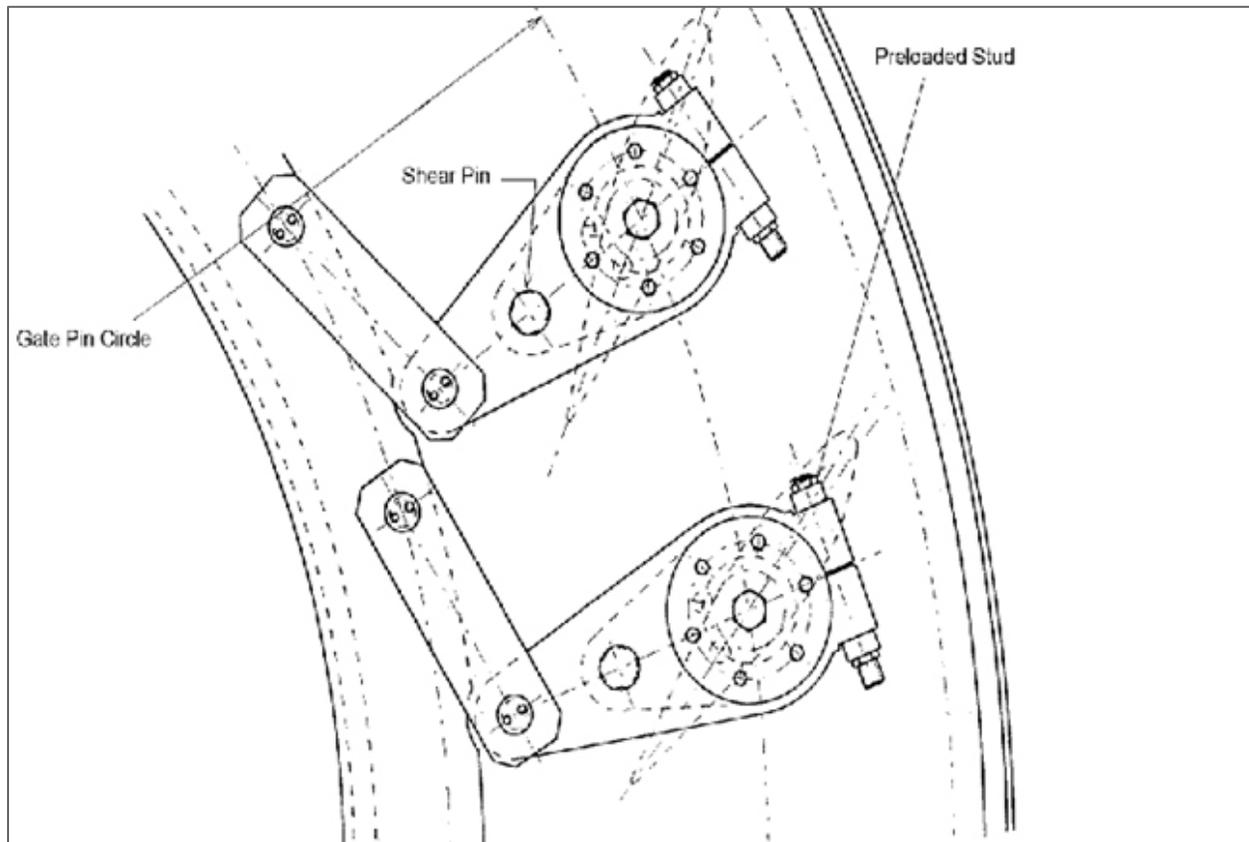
Typical Wicket Gate Mechanism—Plan View
